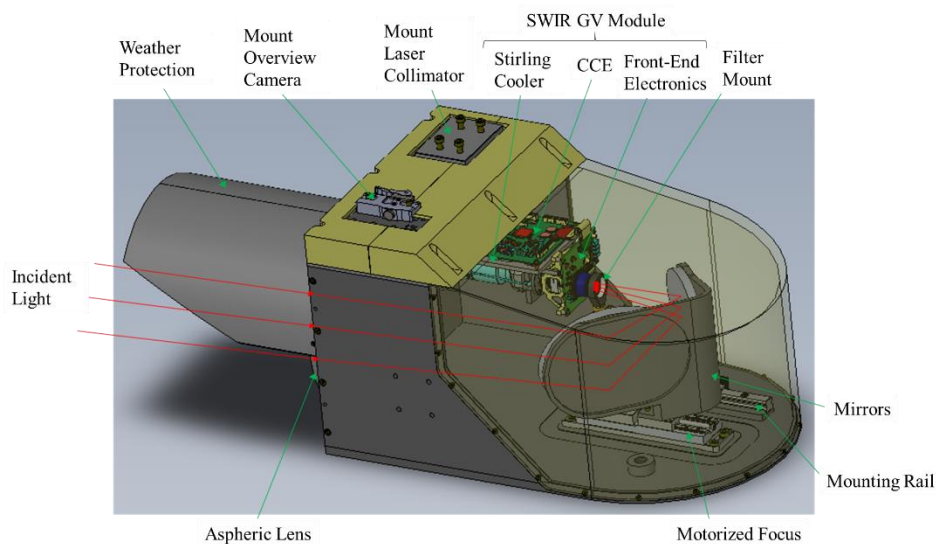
3D CAD sketch of the camera head of the developed SWIR GV field demonstrator
